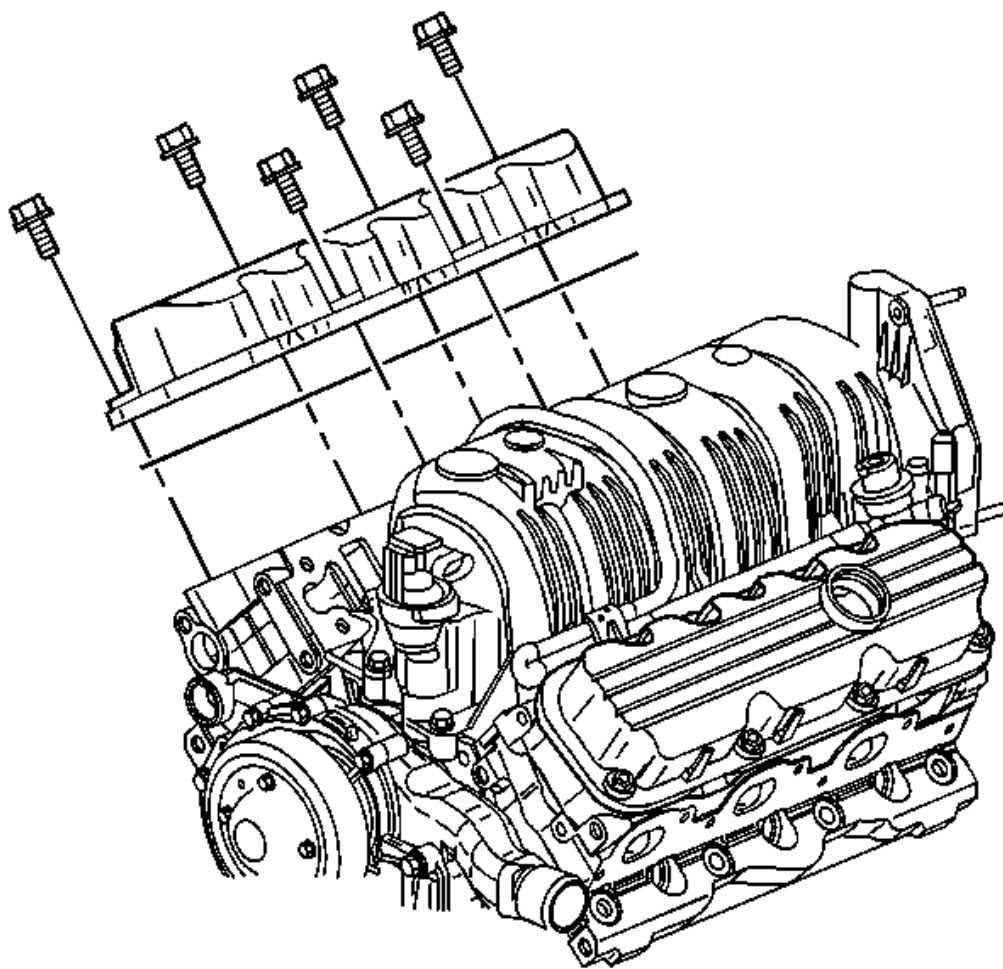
View Of Right Side Valve Rocker Arm Cover
